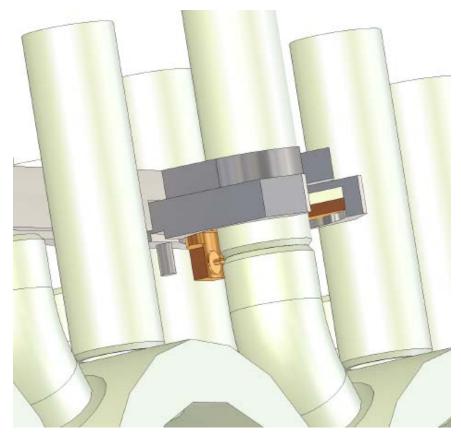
Schematic of the C-Frame Welding Device to Be Used For Completing Existing Tube to Elbow Welds.
